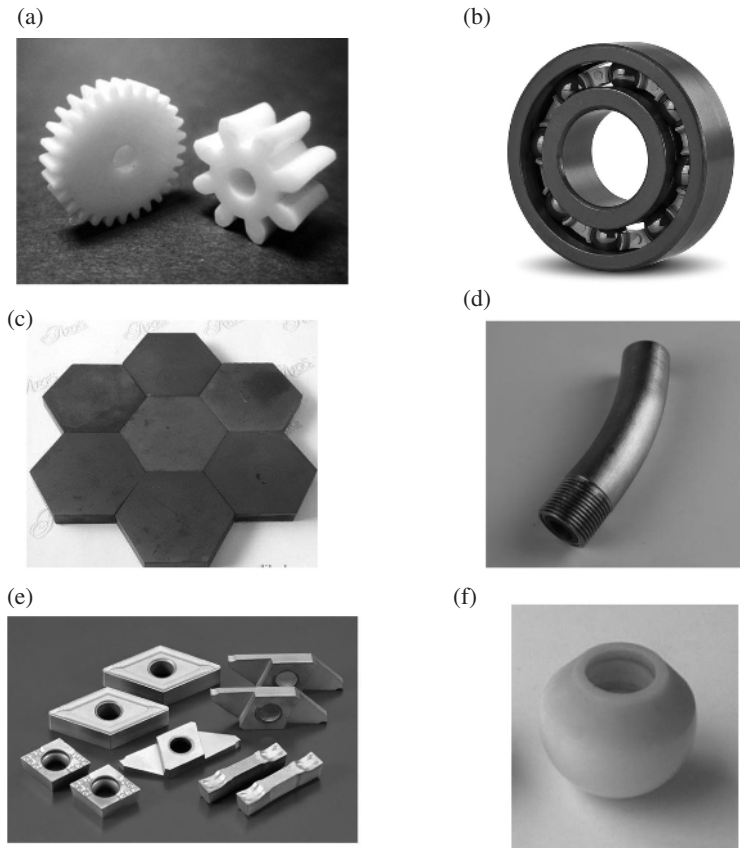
Few representative ceramic components requiring good tribological resistance: (a) zirconia gears [35], (b) Si_3N_4 -based ball bearings [36], (c) SiC-based bulletproof vest assembly units [37], (d) hot-pressed boron carbide nozzle [38], (e) TiCN-coated cutting tool inserts [39], and (f) alumina femoral balls in total hip joint replacement (THR) application [40]. *Source:* Reproduced with permission of Springer Nature.
